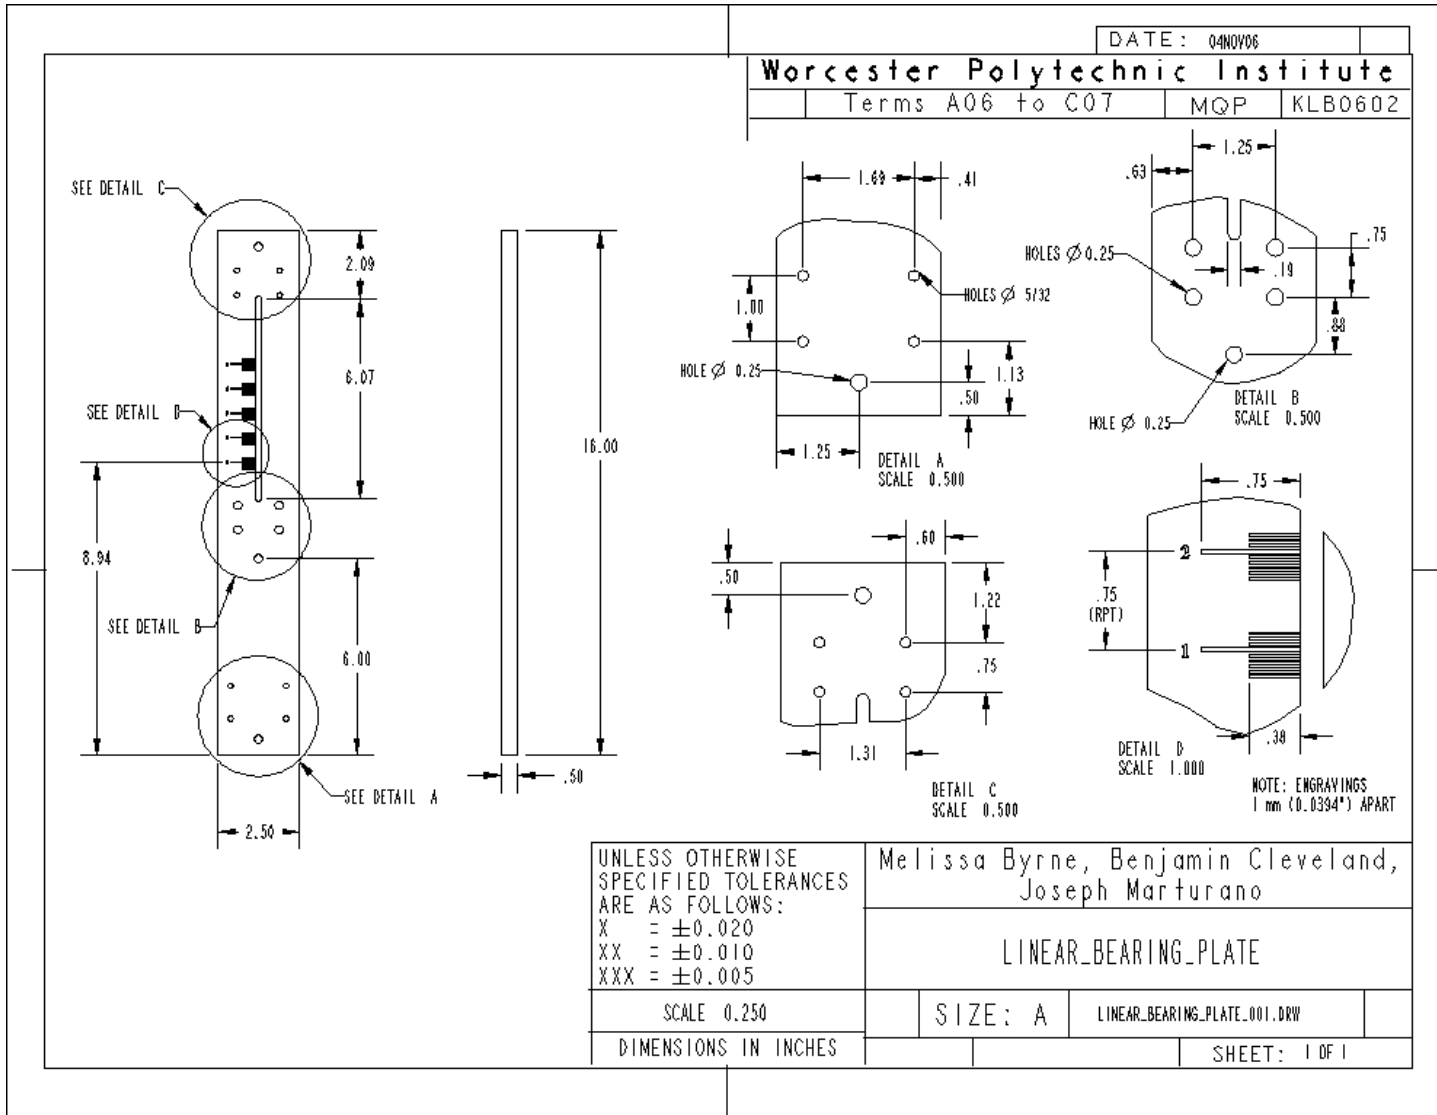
Detail drawing of linear bearing plate showing placement of linear bearings, stop block and height indicators; material: aluminum
